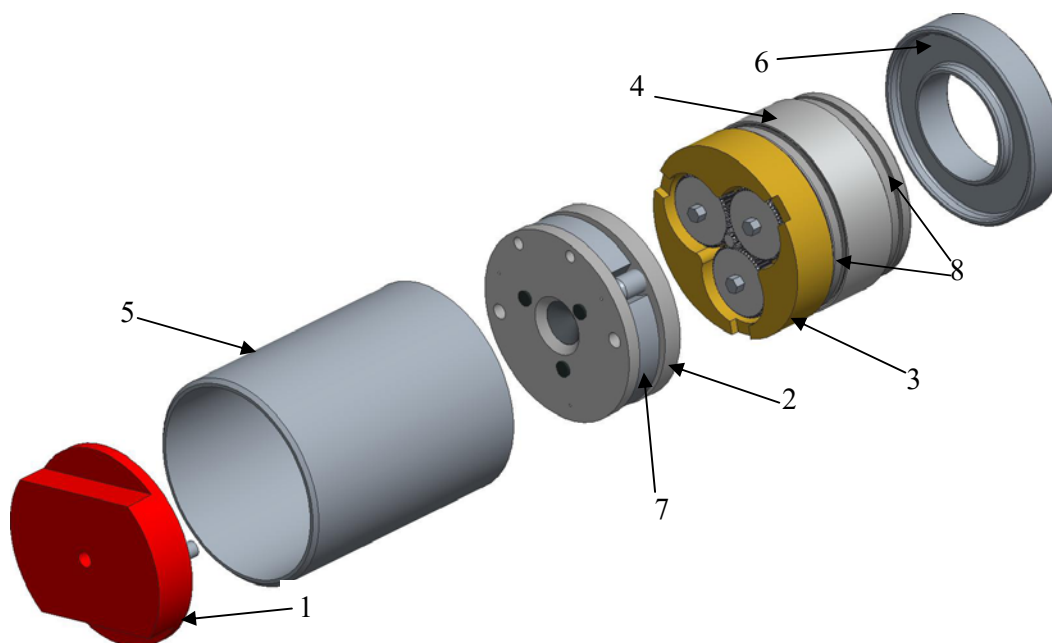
The GL Transmission Kit cross section. 8—Ball bearings. Other numbers see Figure 1.
